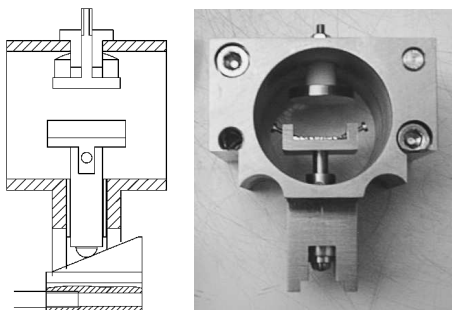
Element for adjusting the resistive plate in height. Side view in workshop drawing (left) and front view photograph (right).
